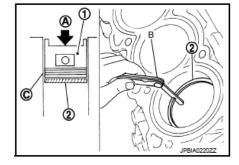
Measuring Piston Ring End Gap Using Feeler Gauge Courtesy of NISSAN NORTH AMERICA, INC.
